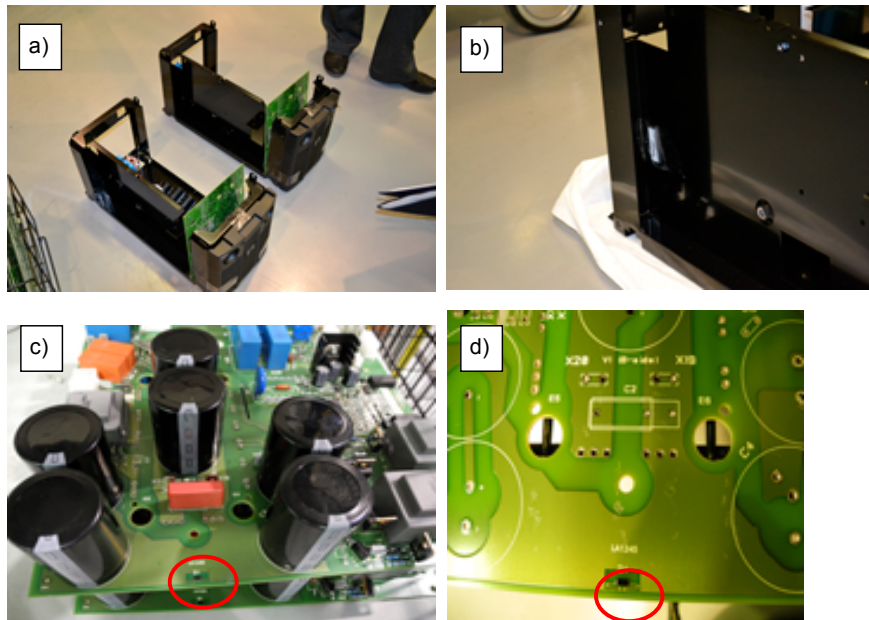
Product examples. (a) Metal housings with printed circuit boards. (b) tag located in a corner of a metal housing. (c) and (d) printed circuit board with a RFID chip surrounded by a red circle.
